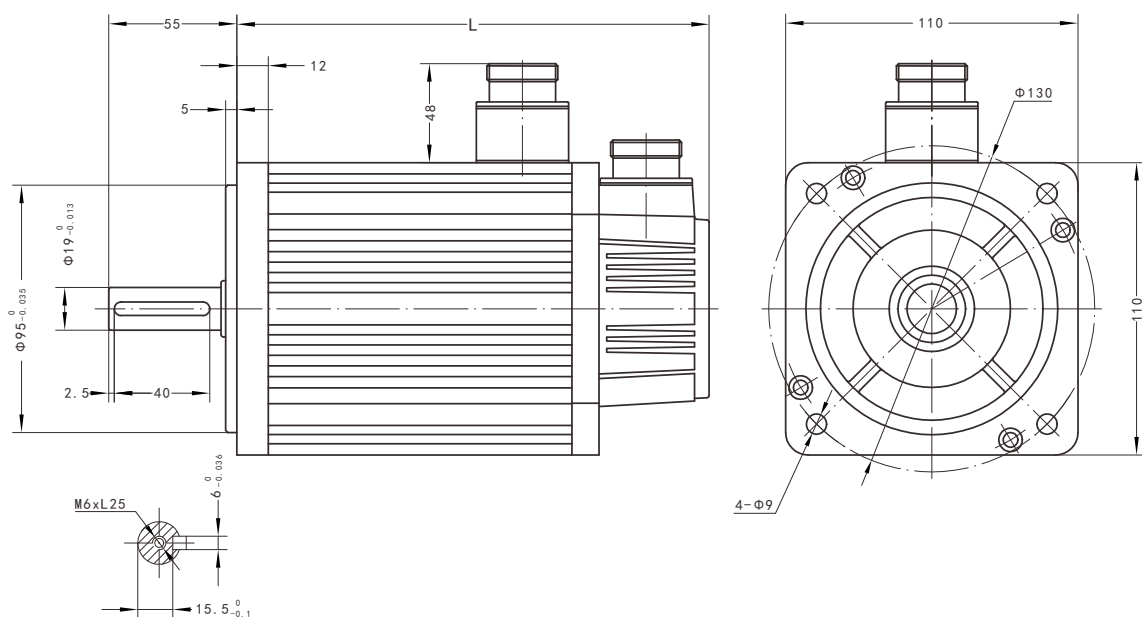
Installation dimensions of WE series 110 flange servo motor
